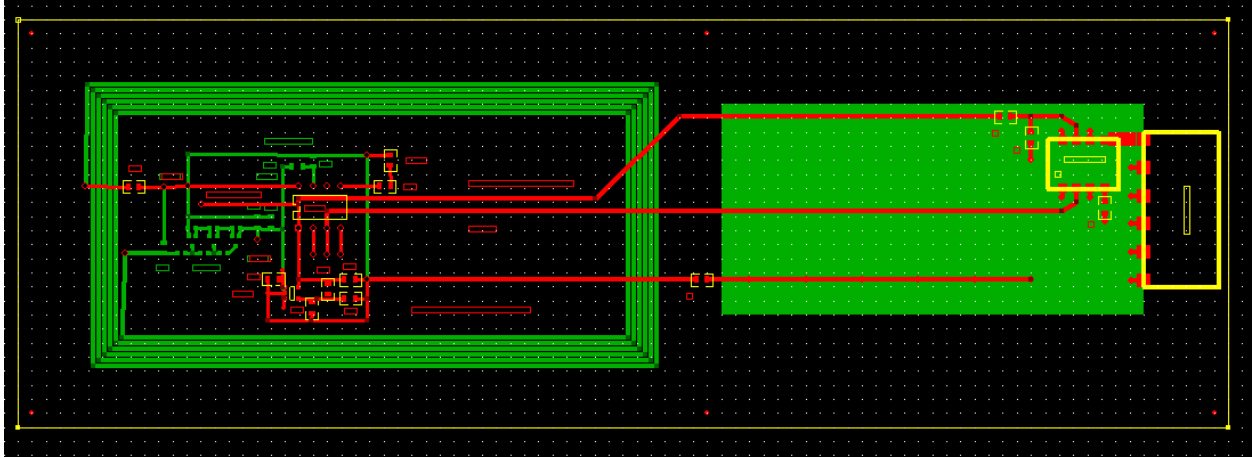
Tag B v3 PCB Design with Transmitter Elements.
